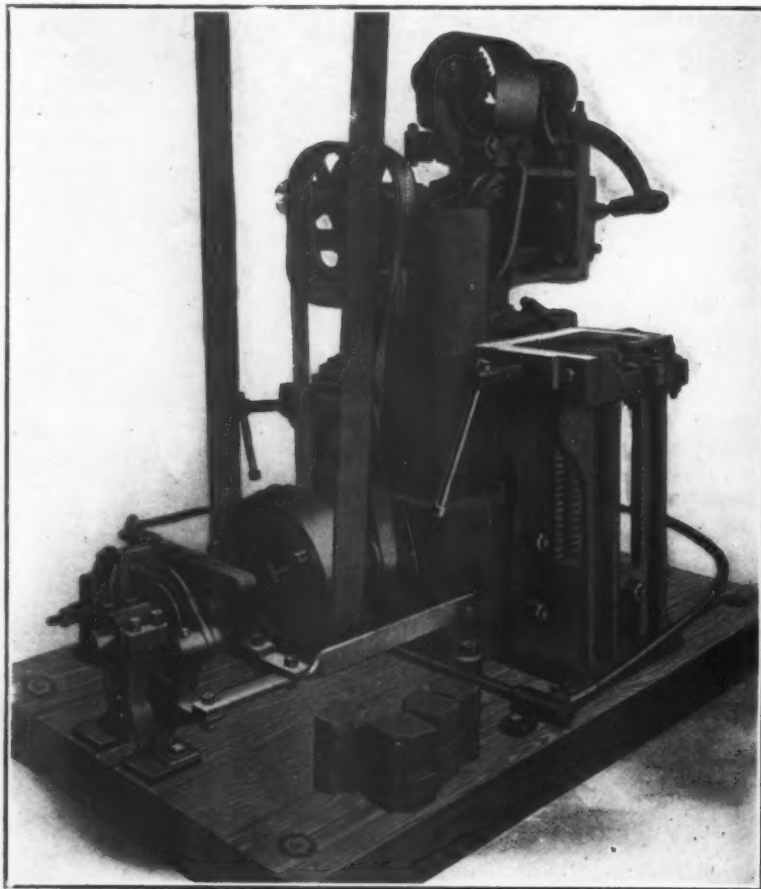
Rear View of the Hammer, Showing the Drive and the Vise.
